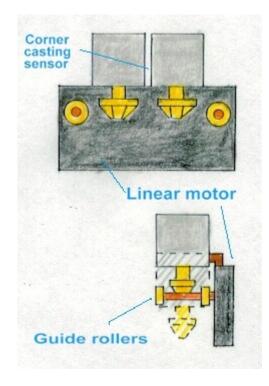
Front and side views of the twin twenty adapter mechanism.
